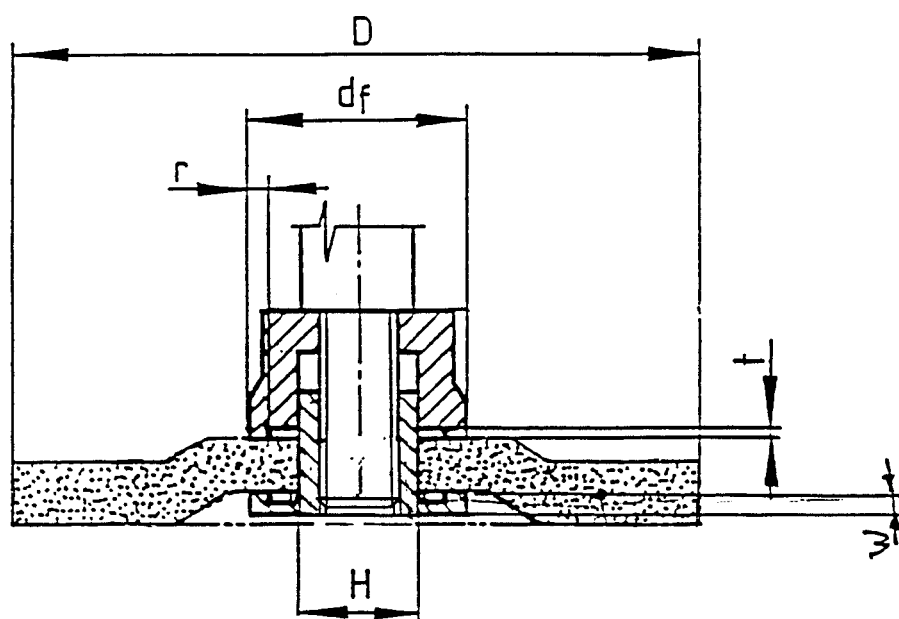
c - Example of flange assembly for reinforced depressed centre cutting-off wheels of type 27 and 28
